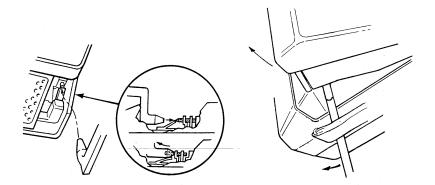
Removing Top Cover from the Spectra Camera (See Spectra Disassembly/Reassembly Section for details)
